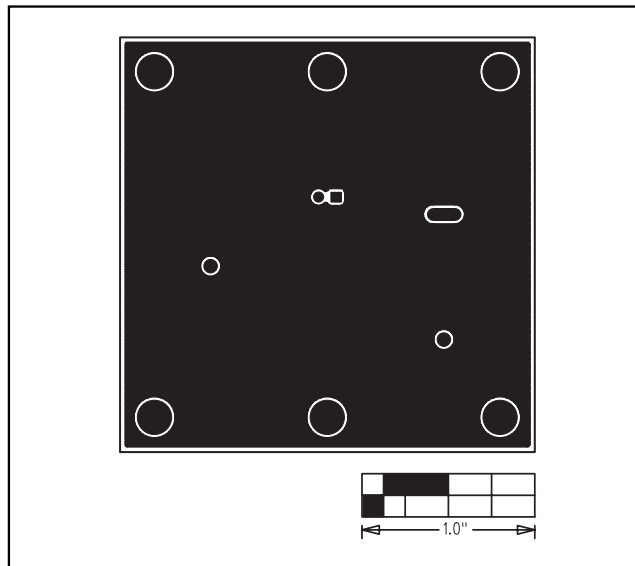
MAX9586 EV Kit PCB Layout—Solder Side
